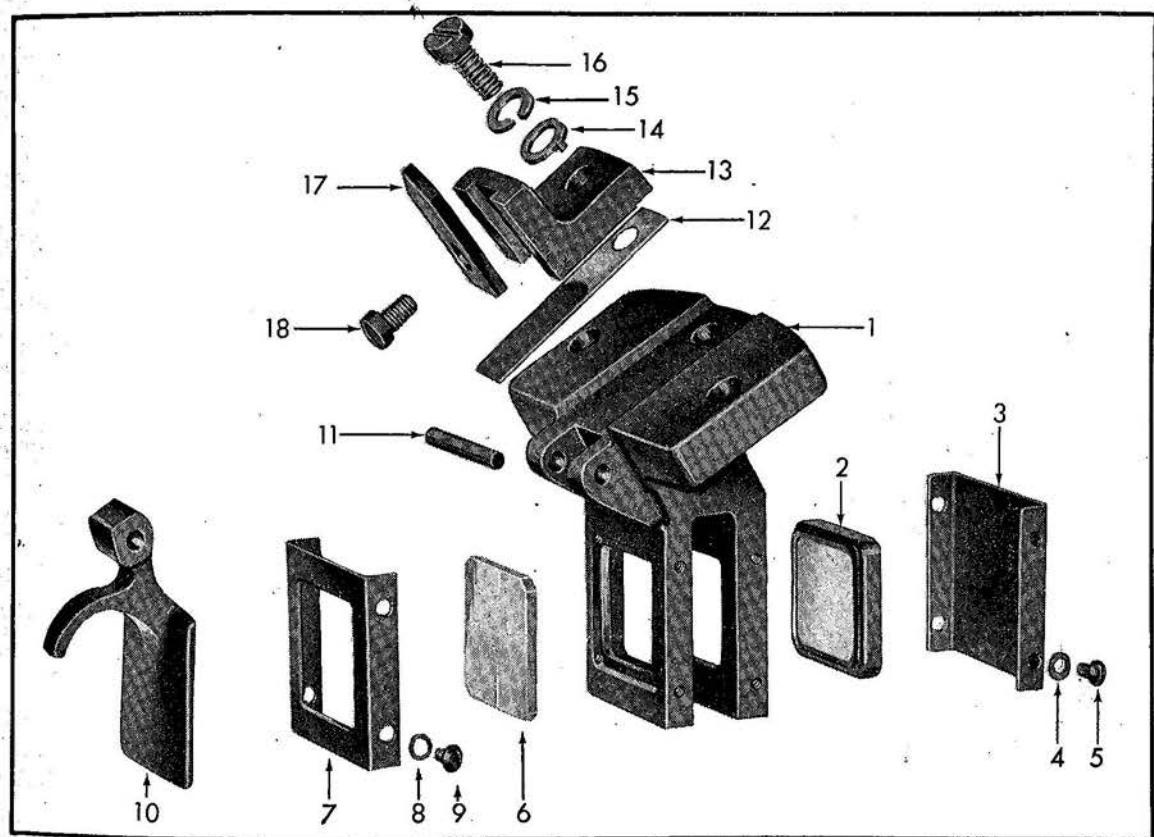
Sequence of Disassembly of Front Luminous Sight
